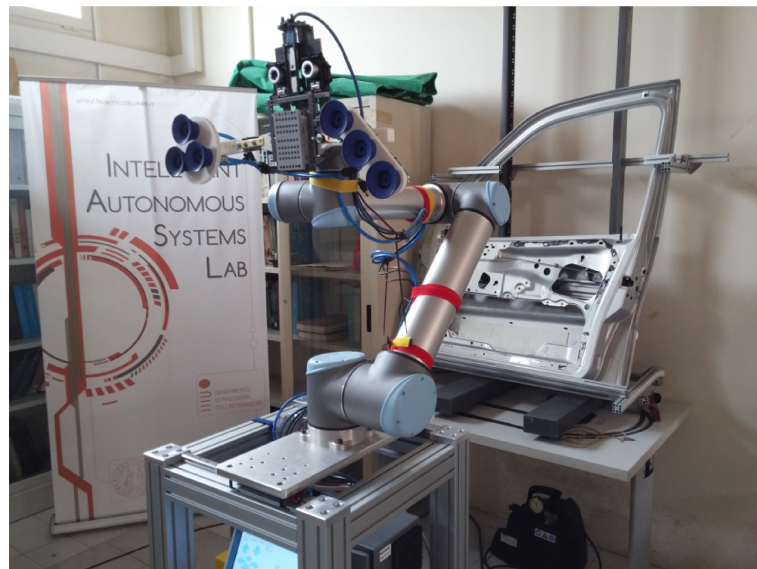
The replica of EuRoC benchmarking platform built in our laboratory.
